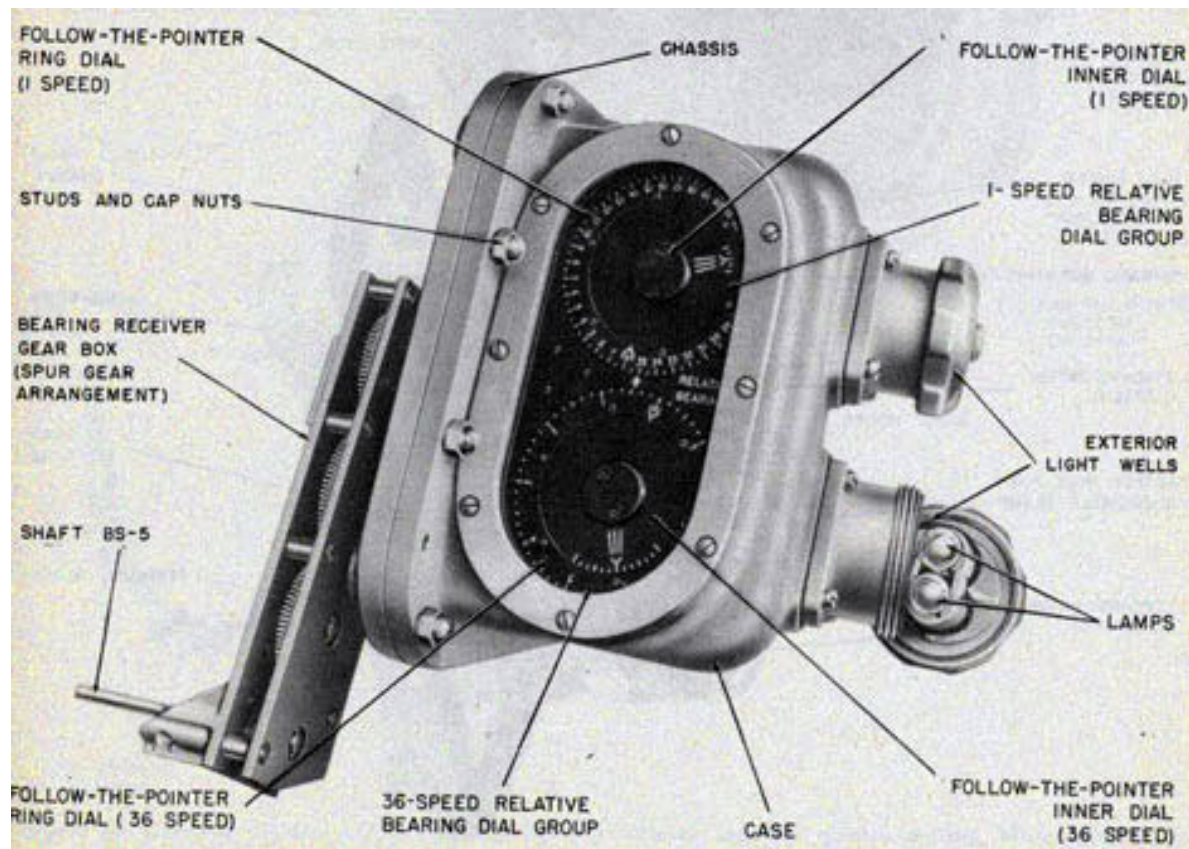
External lighting type bearing receiver with gear box connection to computer mechanism.
